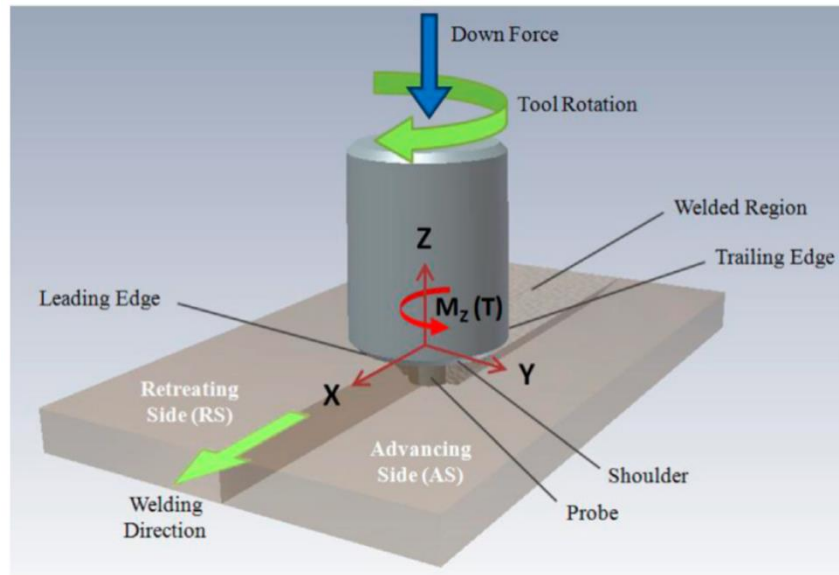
Process Explaining 3d Moment of Friction Welding
